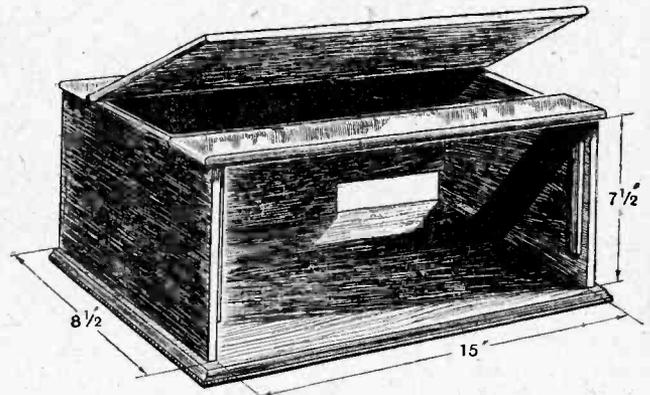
Cabinet for the receiver, constructed of wood 3/8 in. thick.
